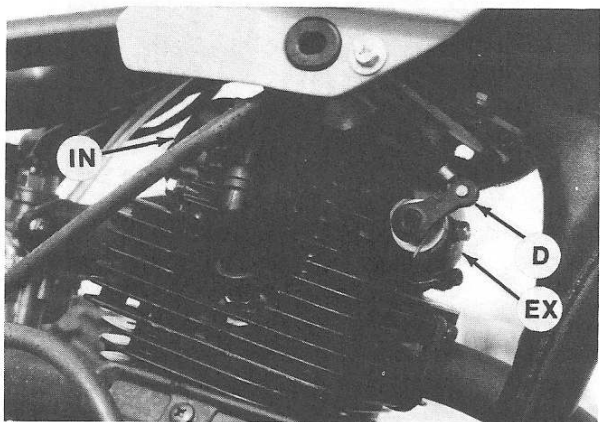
View showing location of intake valve cover (IN), exhaust valve cover (EX) and decompression lever (D).
